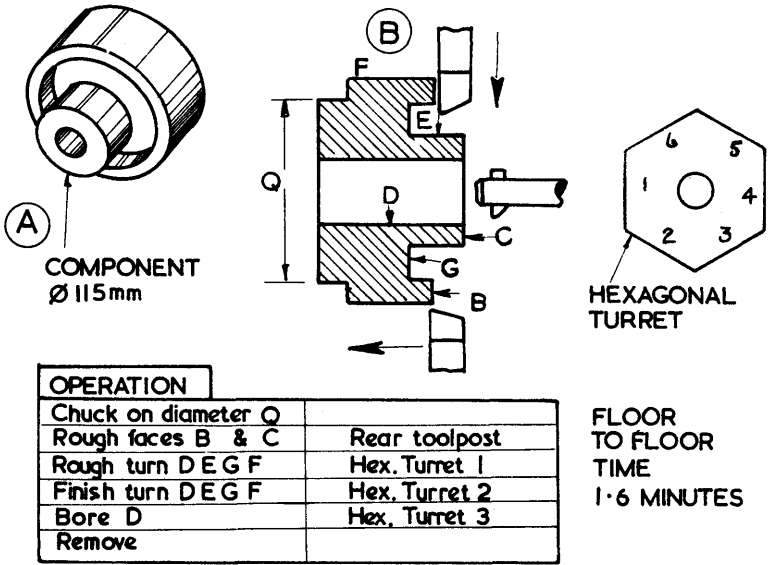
Machining Technique on a Capstan Lathe.
